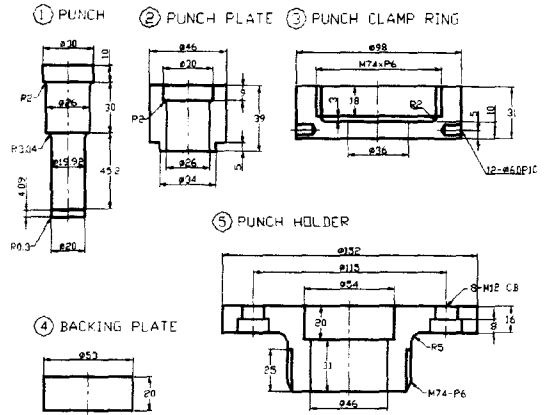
Details of die components for forward extrusion die(upper parts of a die)
